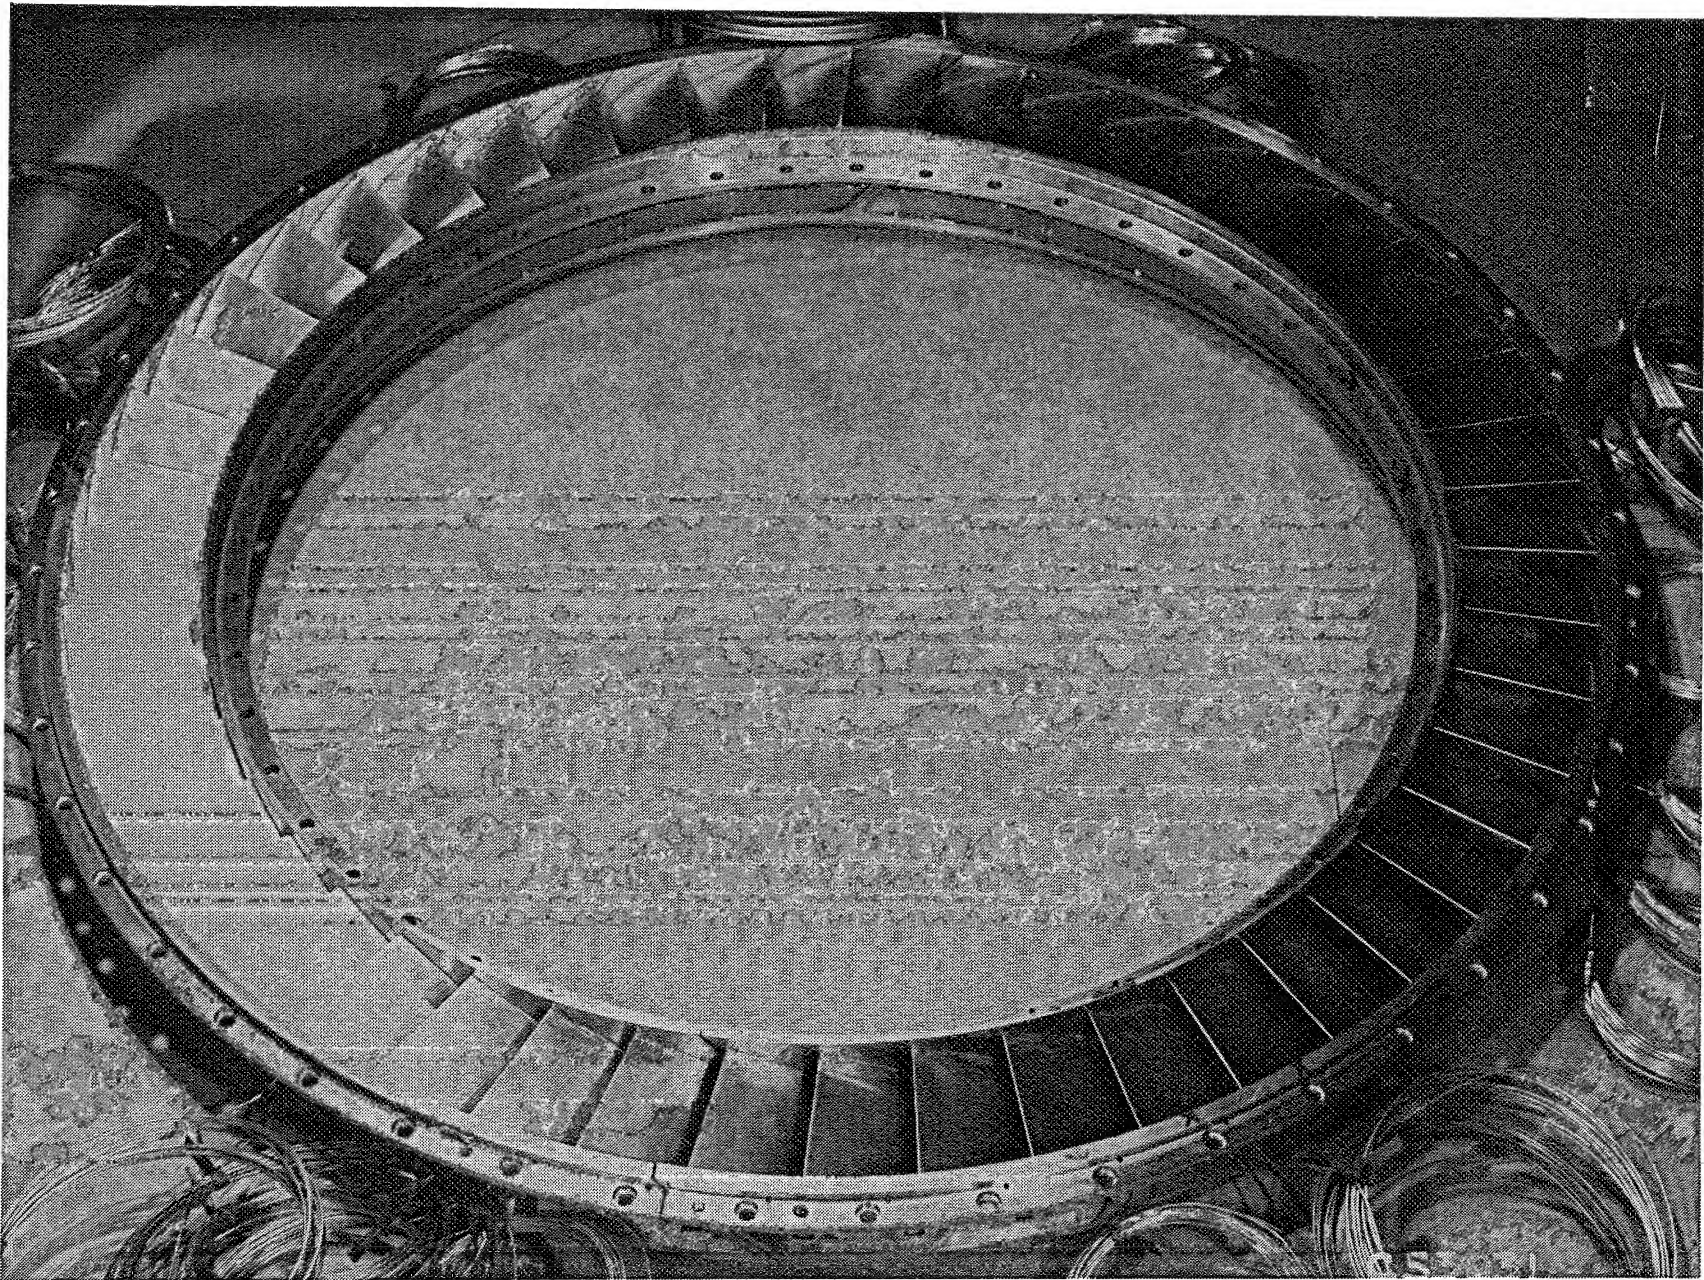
Stage 2 Nozzle Assembly (Aft Looking Forward)
